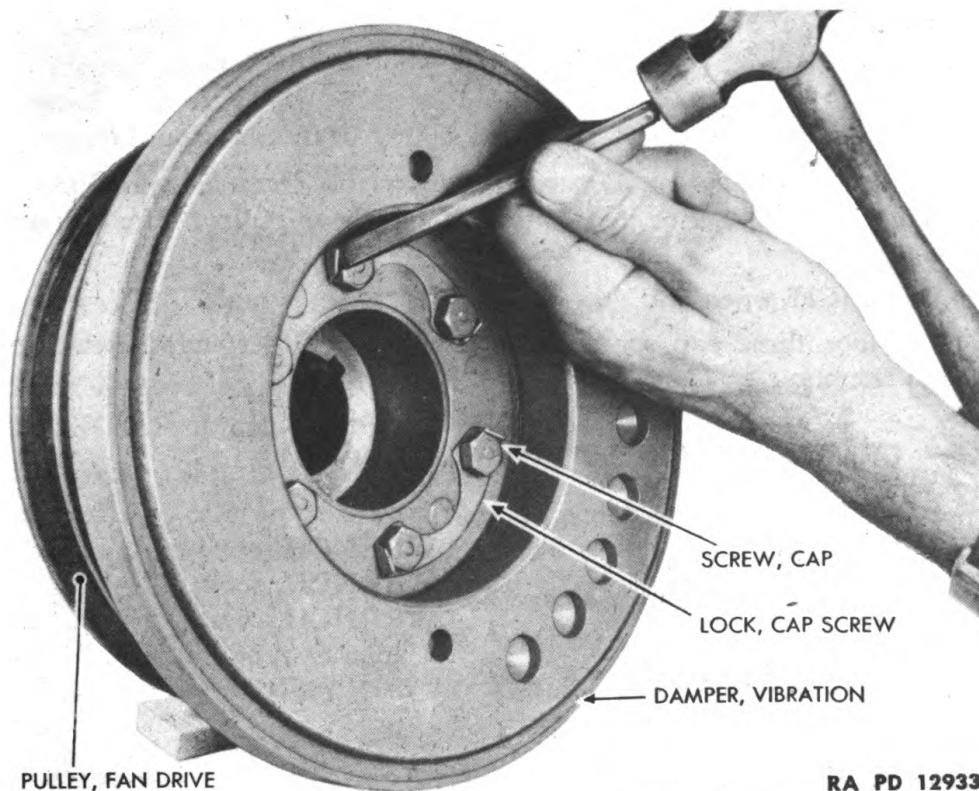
Removal of Vibration Damper from Fan Drive Pulley
